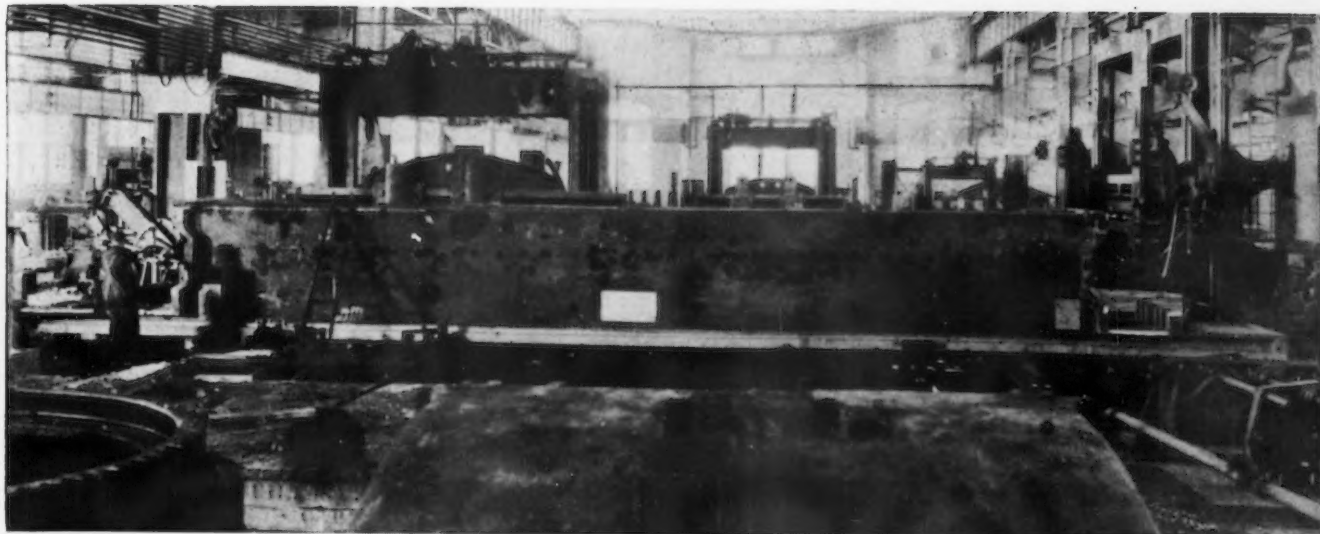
Surfaces on the rear of the 40-ft. boring mill crossrail were machined on this 13-ft. planer equipped with side column.
